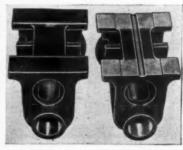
shows a machined and unmachined base of a magnesium casting. This machining was originally done in two operations using conventional milling cutters which had been ground for milling magnesium.
